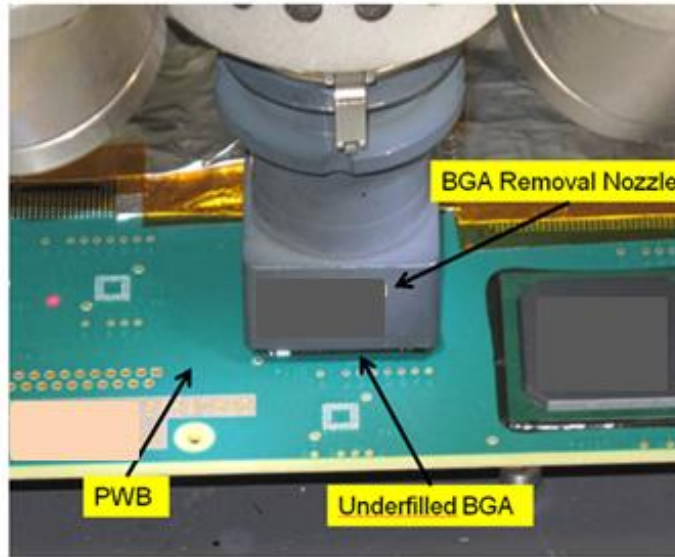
Typical Setup for an Underfilled BGA Removal using a Hot Air Rework Machine
